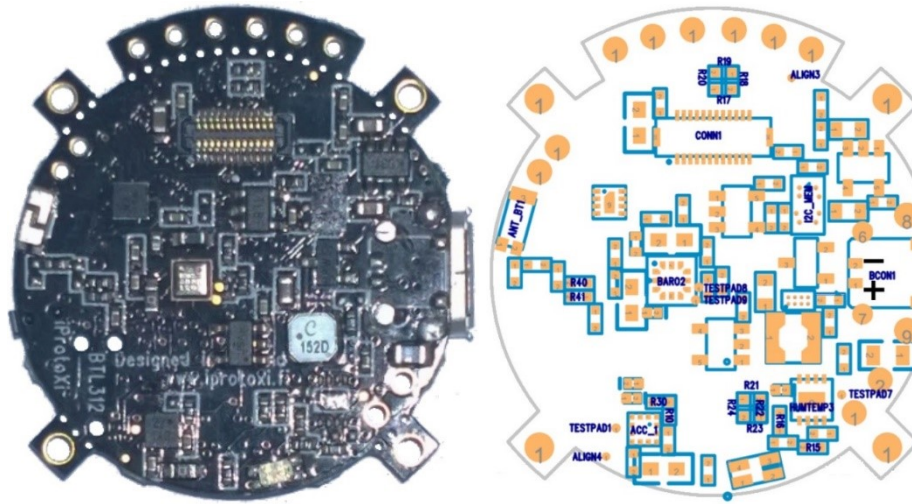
The host platform bottom side, Left: BTL3H3 image, Right: the bottom side components placement [191].
